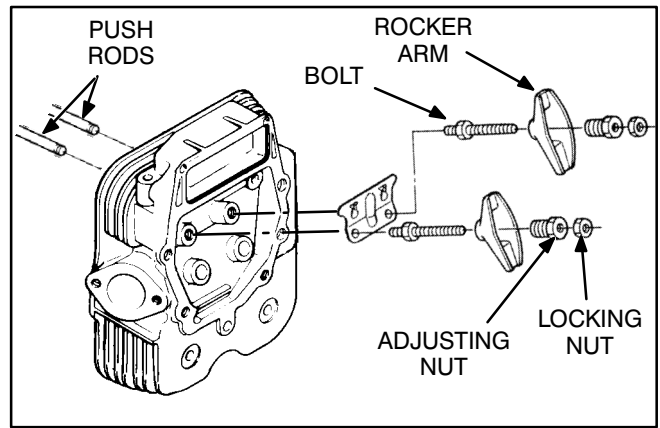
ROCKER ARM AND PUSH ROD REMOVAL
